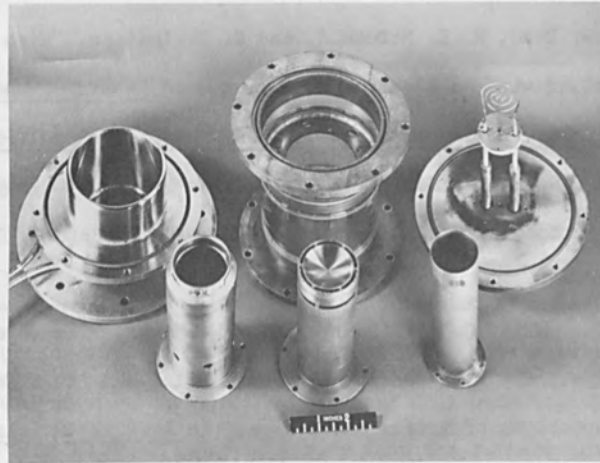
The Electron Gun Disassembled to Show Component Parts.
